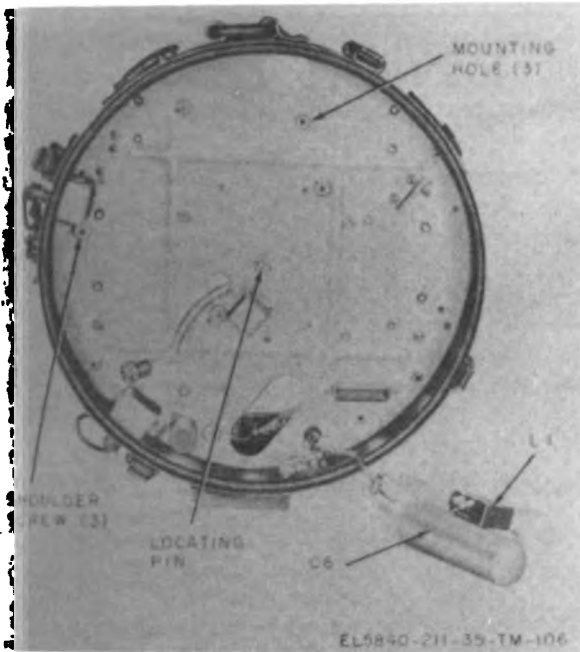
Receiver-transmitter, center section, front side, microwaves assembly removed.
